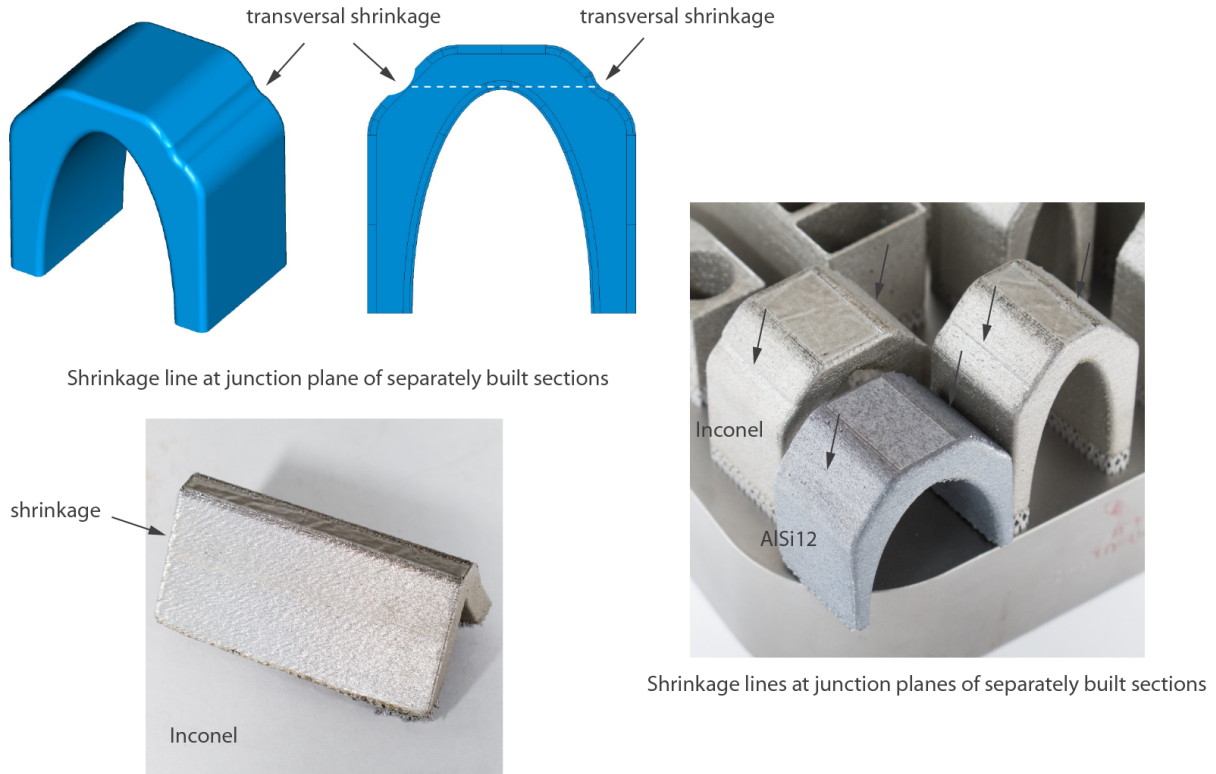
Remarks on the junction test pieces. The transversal shrinkage shows in all specimens.
